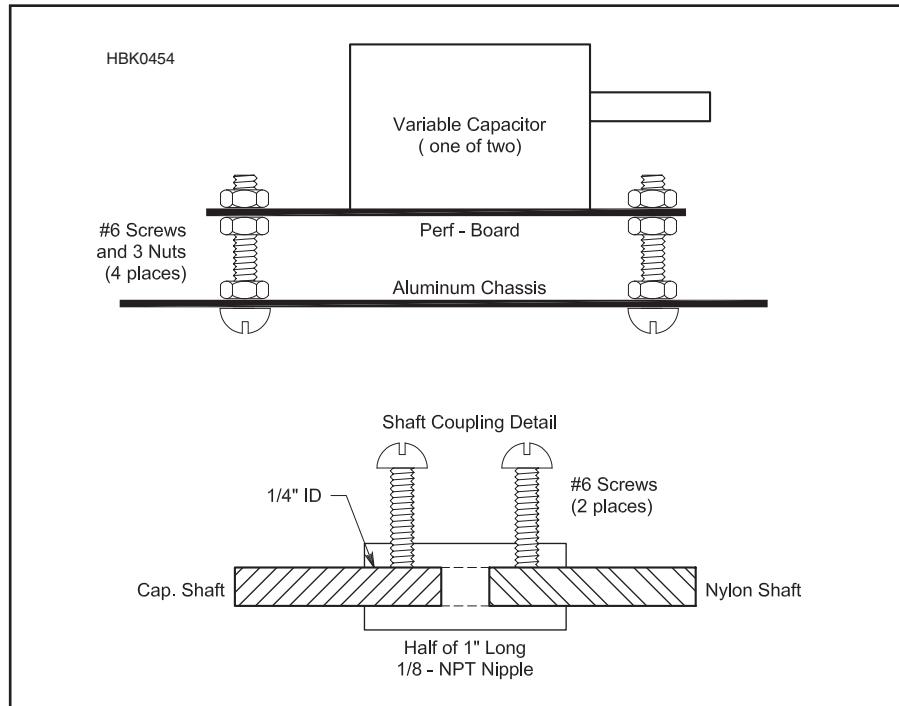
The variable capacitors are insulated from the chassis by mounting them on perforated board. A 1/8-NPT nipple is made into a shaft coupling to couple the insulating shafts to the main capacitor shafts.
